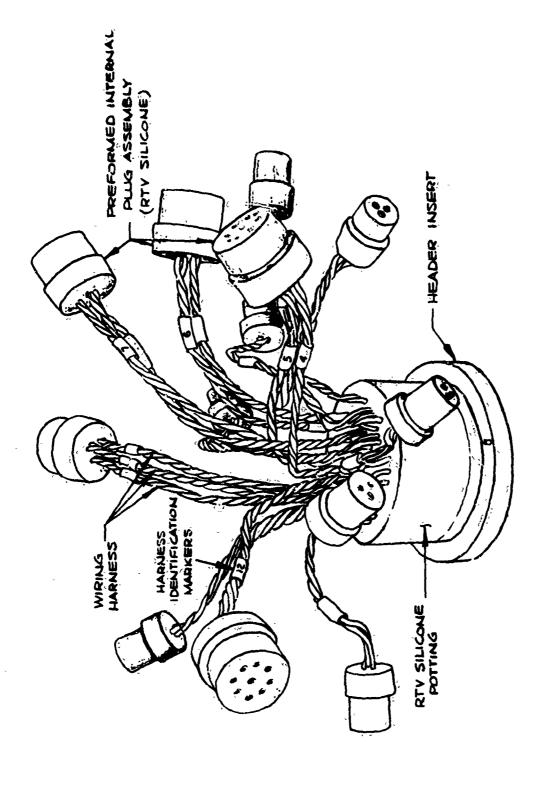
Junction Box Internal Wiring Method -- Internal Plug Assemblies
